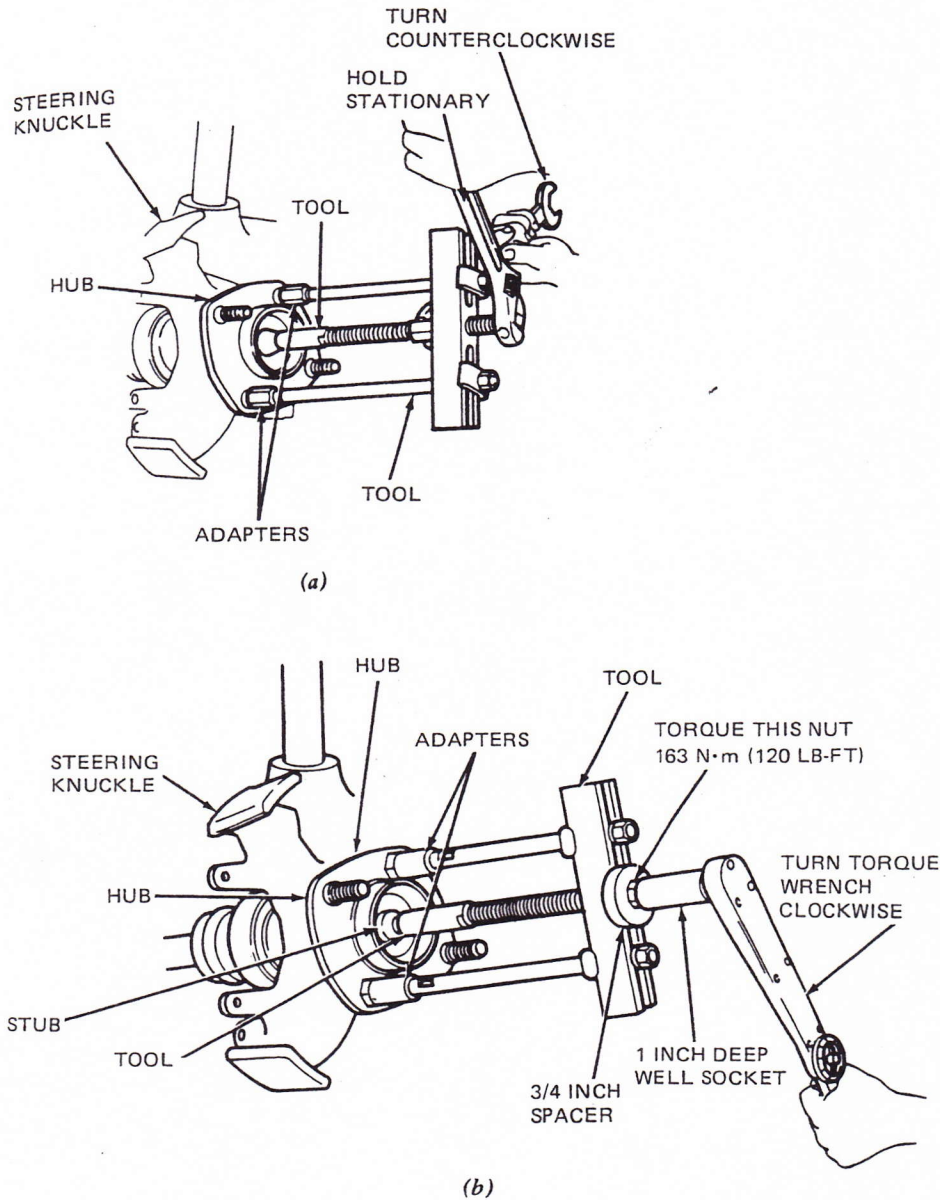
Replacing Wheel Bearings. (a) Removing hub from constant velocity universal joint stub shaft; (b) installing hub to constant velocity universal joint splined stub shaft. (Courtesy of Ford Motor Company)
